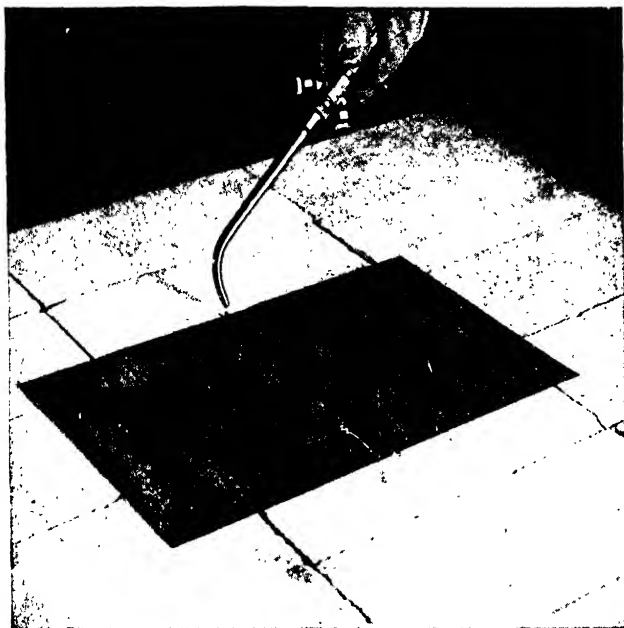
Lesson 4. Practice flange weld. Take two pieces of 24 gauge sheet. To prepare the joint turn up a very thin edge along one side of two pieces of the sheet. The flange can be turned over the edge of a steel plate, or in any other way that is convenient. The height of the flange above the surface of the sheet should not be more than the thickness of the sheet; if higher, shear off the extra metal. Put the two flanged edges together so the flange stands up, and weld from one end to the other by melting down and fusing the flanges. No welding rod will be needed. It is a little more difficult to secure fusion to the under side in this kind of a weld because of so much more metal to melt down, but it can be done without burning holes through after acquiring sufficient skill. Testing. Such a weld should be tested in the same way as the previous type.
